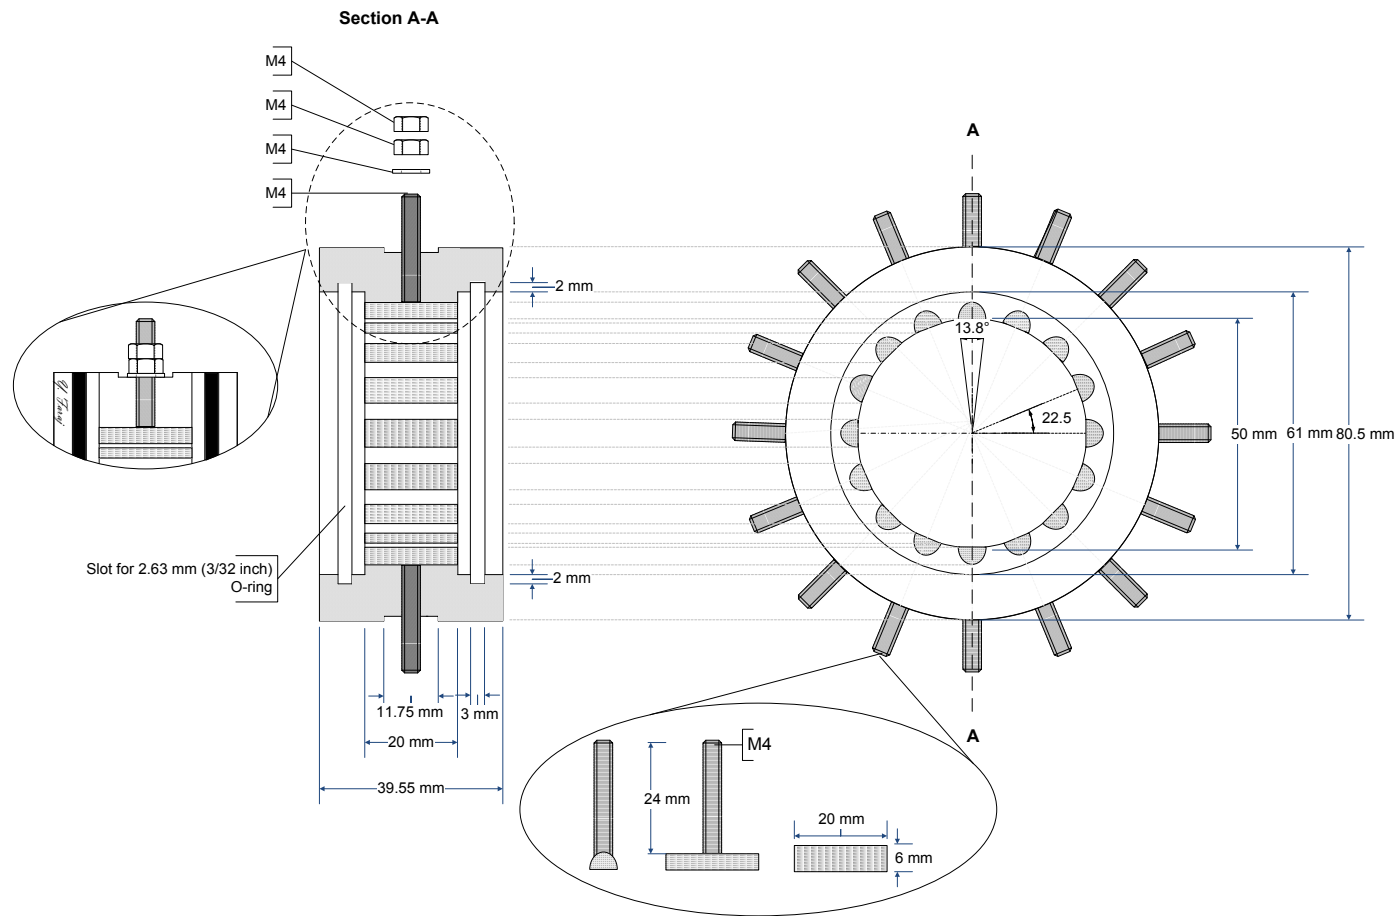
Schematic drawing of the 16-electrode ERT plane sensor
